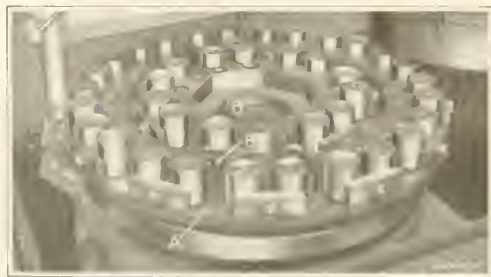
Special Fixture for holding Roller Bearing Rolls on Blanchard Vertical Surface Grinder
